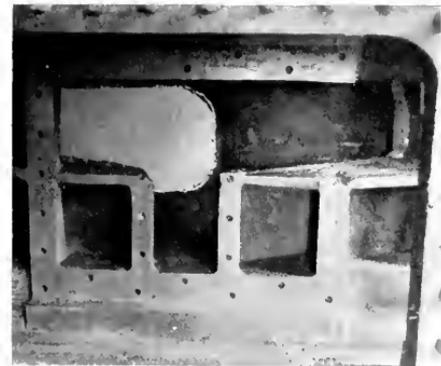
Another View of Main Engine Casting shown in Fig. 1. The hole in the cylinder wall was cut through to facilitate welding the steam port wall.
